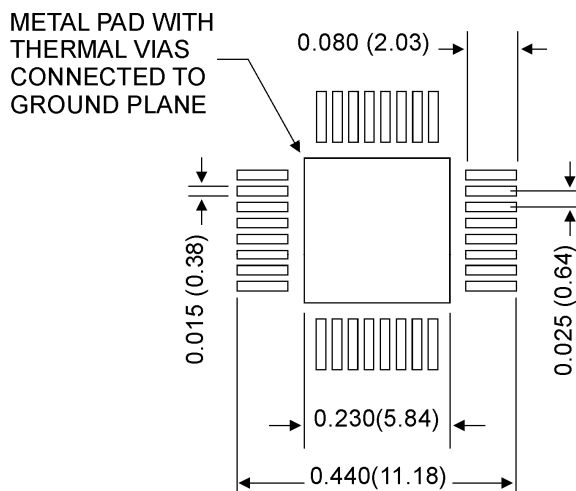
RDA012-QP footprint, dimensions shown in inches (mm).
